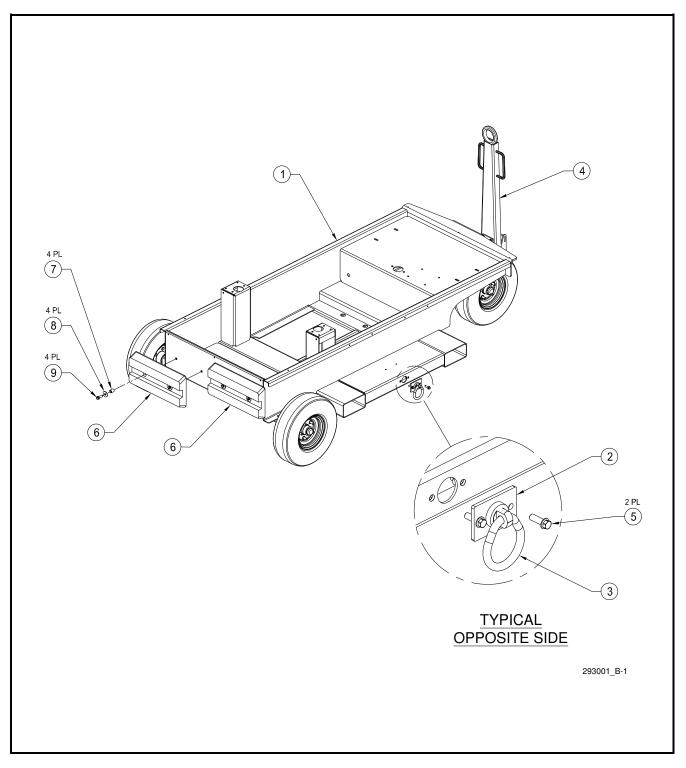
Trailer Assembly Common Platform (Sheet 1 of 2).
